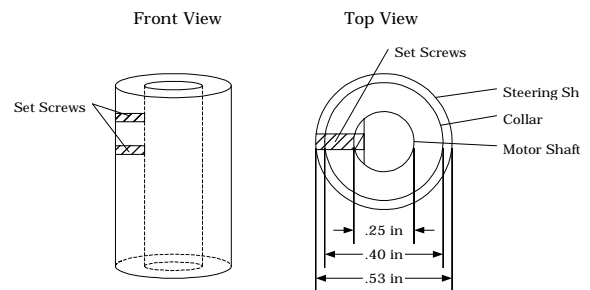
Collar for Attachment of Motor to Steering Shaft.
